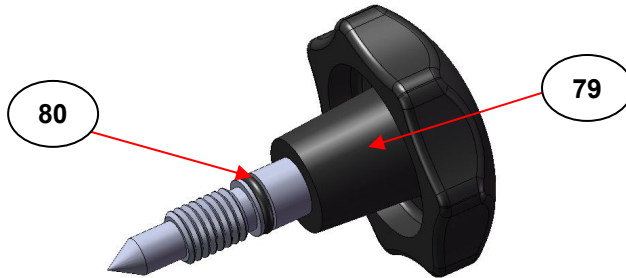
Low Tonnage Gauge Open/Close Valve Tap Assembly
